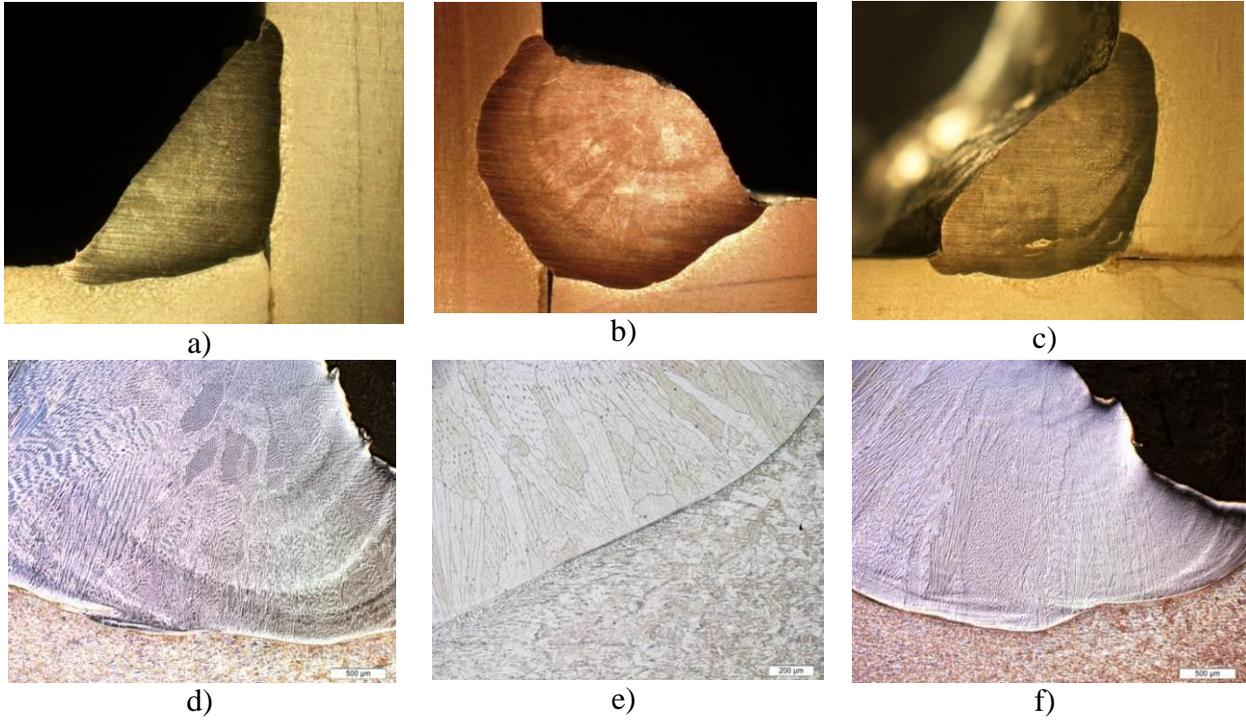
ENiCuRu Fillet Welds: a), b), and c) Macrostructure; d), e), f) Microstructure. Welding positions: a) and d) flat; b) and e) vertical down, c) and f) overhead
